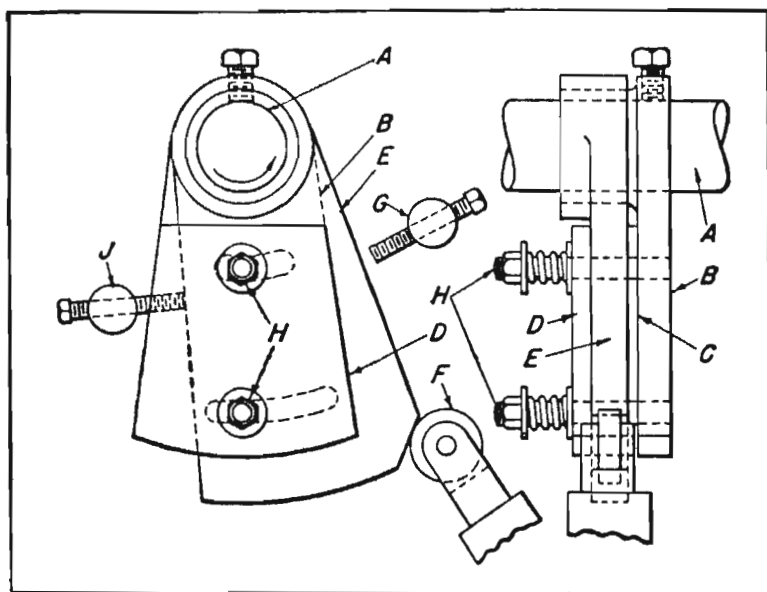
Adjustable Oscillating Cam which Controls Admission or Discharge of Air to a Pneumatic Cylinder that Actuates Work-holding Fixtures. Amount of Oscillation of Cam-plate *E* can be Adjusted by Stop-screws *G* and *J*.
